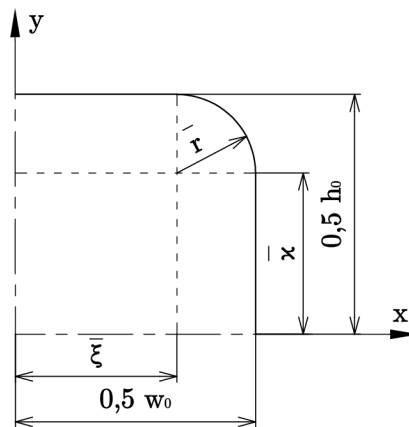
Quarter of rectangular cross section of the workpiece [12]
